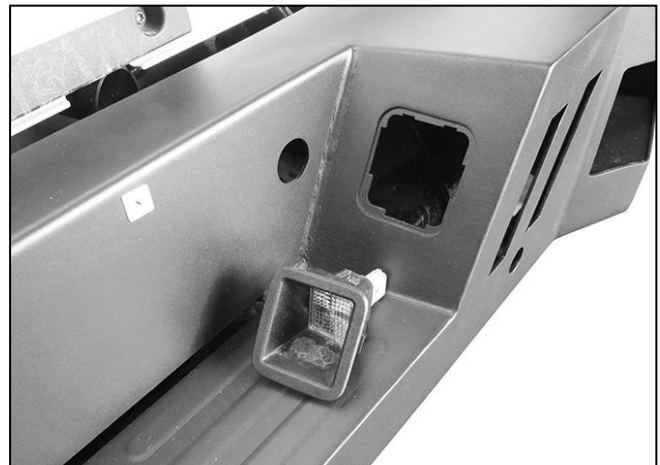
Attach Bumper to outside of frame (passenger side pictured)
